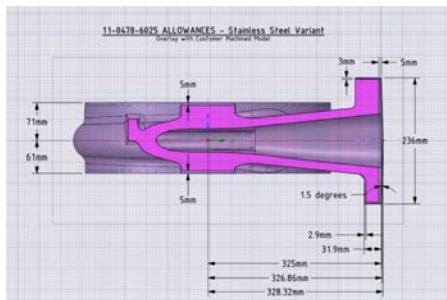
Stainless Steel Machining and Draft Angle Allowances
